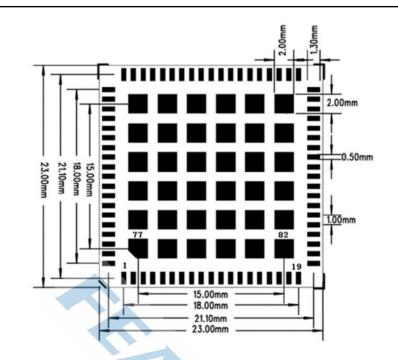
FSC-BW1001UV footprint Layout Guide (Top View)
